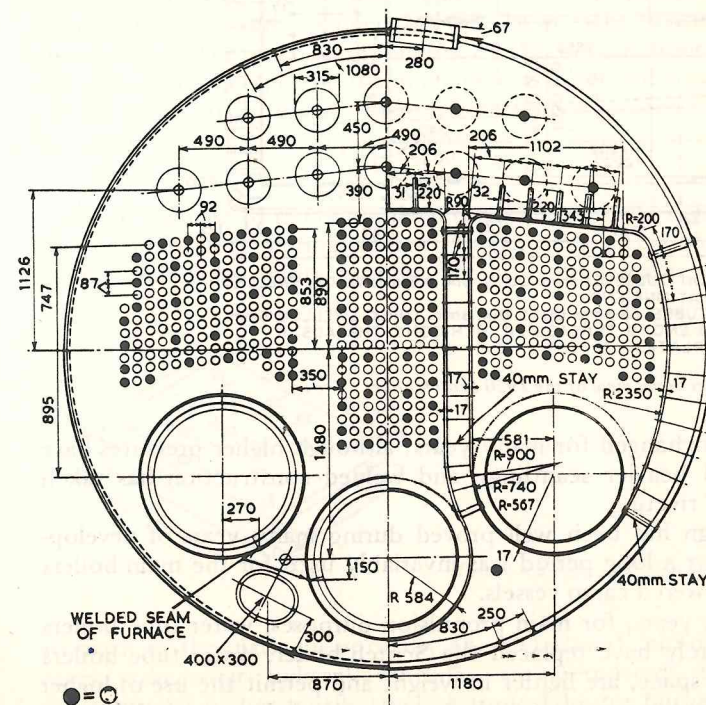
(b) End view of Scotch boiler made about 1950 with a working pressure of 11 bar
